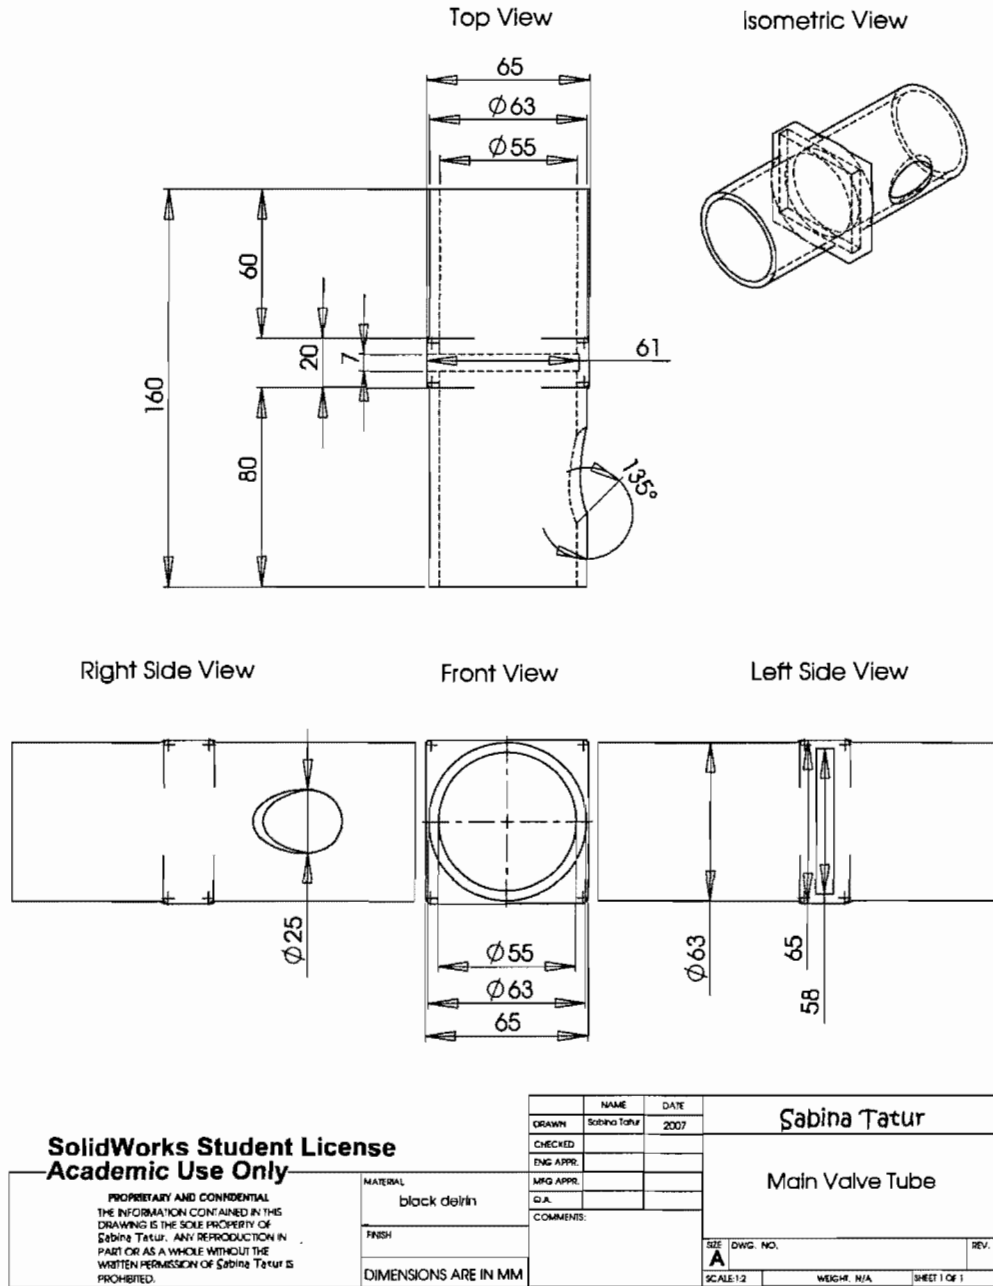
Detailed 2D engineering drawing of the main valve tube
